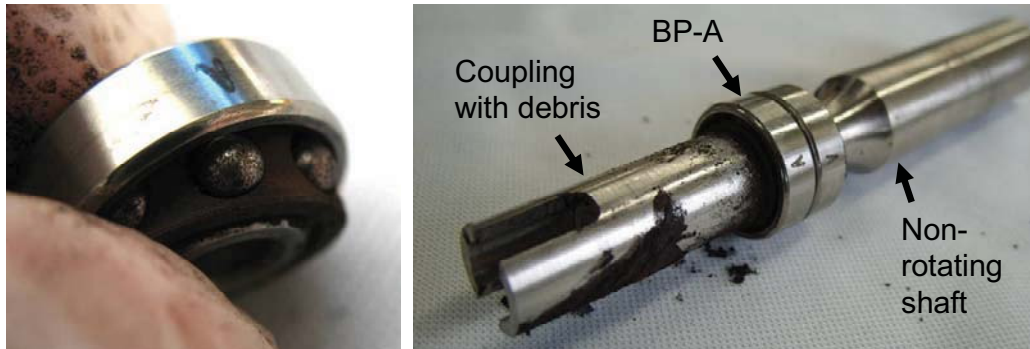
Post-Test BP-A (Left – hand separable bearing; Right – shaft with particulate)
